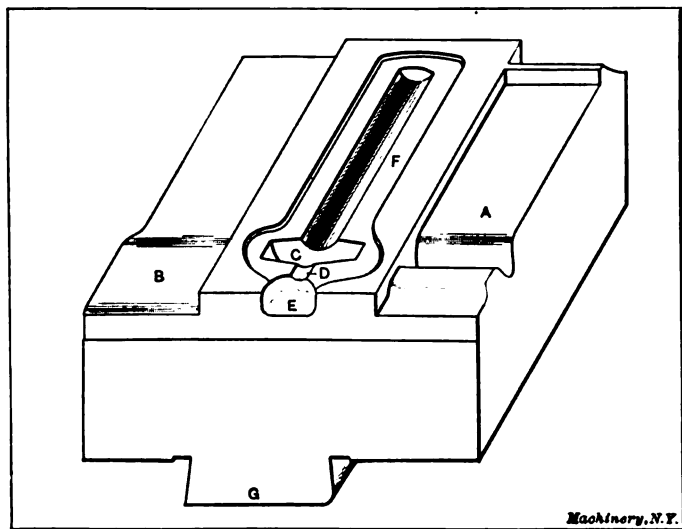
The Lower Die of a Pair of Drop-forging Dies
